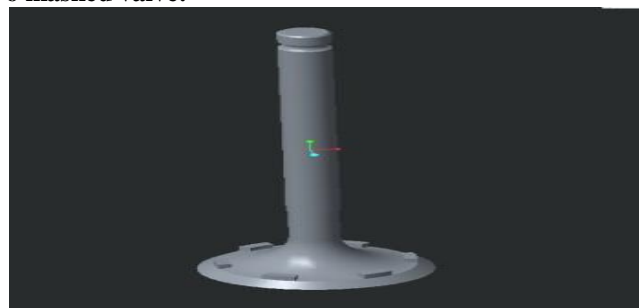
Type 1 inlet valve (valve with 6 masks on its head)
